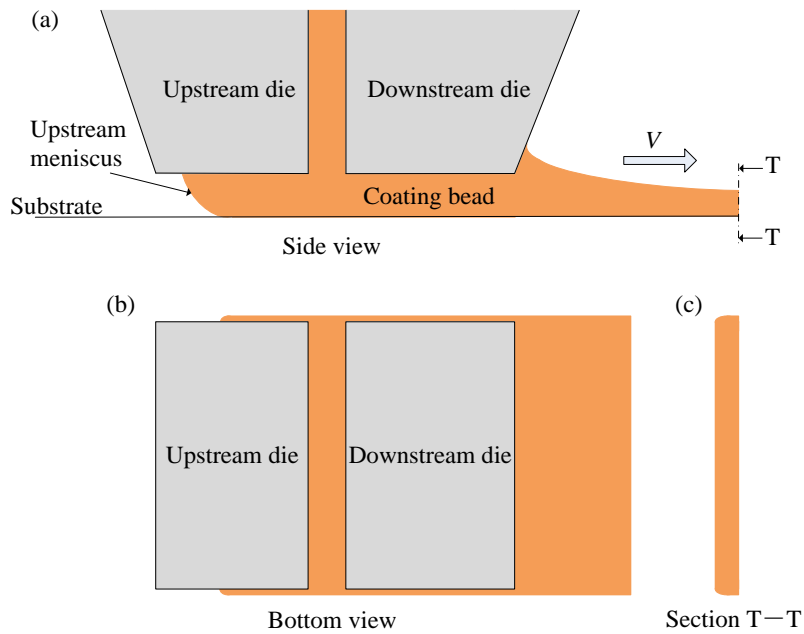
Schematic of a defect-free coating. a) side view, b) bottom view, c) cross-section view of the coated film
